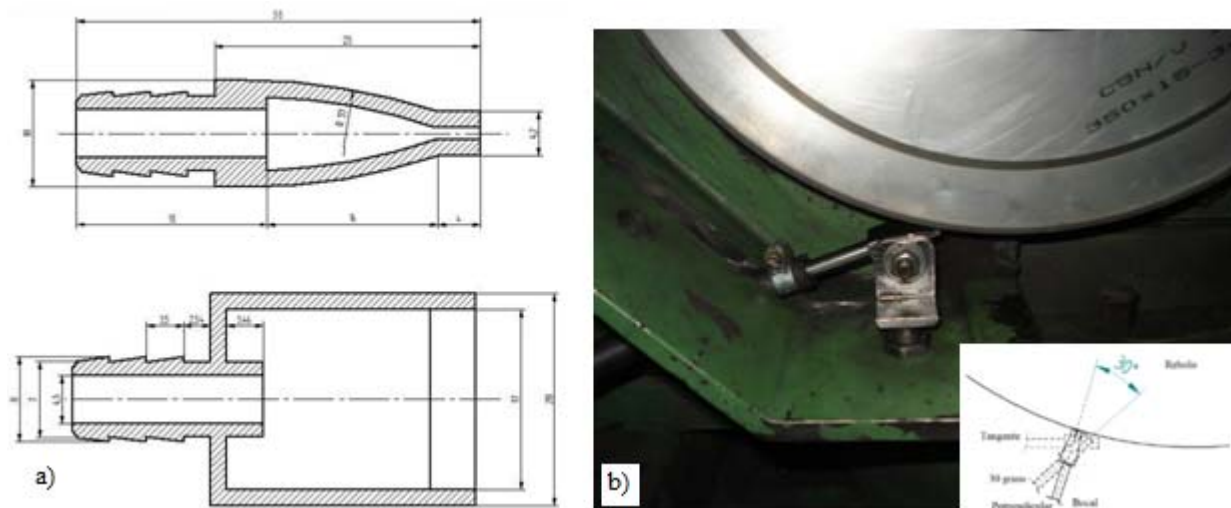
(a) Design of the nozzle cleaning, (b) Setup of the cleaning nozzle.
